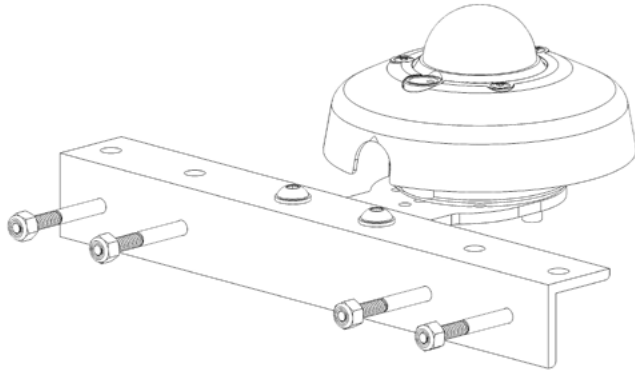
R2 Bracket assembly 14983 permits mounting in the plant of a fixed PV array.
